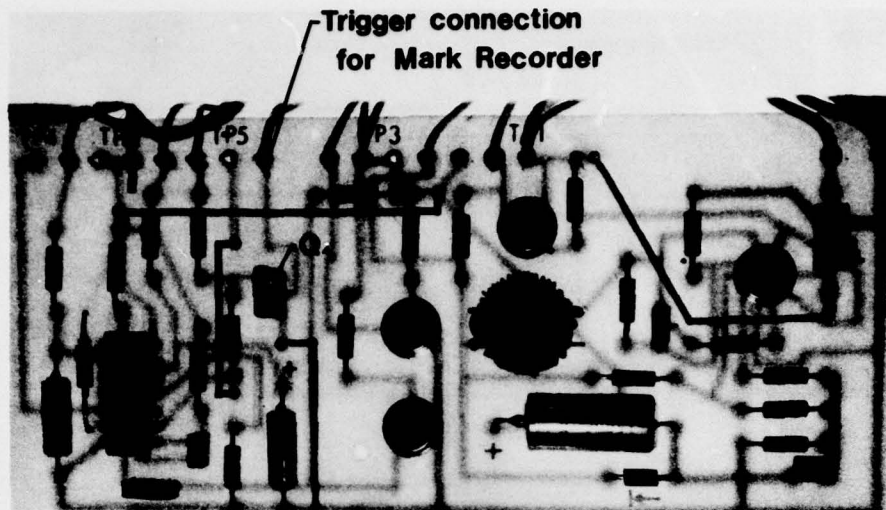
Circuit board of the present laser weapon fire simulator. The trigger pulse required to operate the Mark Recorder is obtained from the collector of Q4 at the pin adjacent to TP5 as shown. A ~20-cm long, 22-gauge flexible wire is used to connect this point to pin D on the power connector of the simulator.
